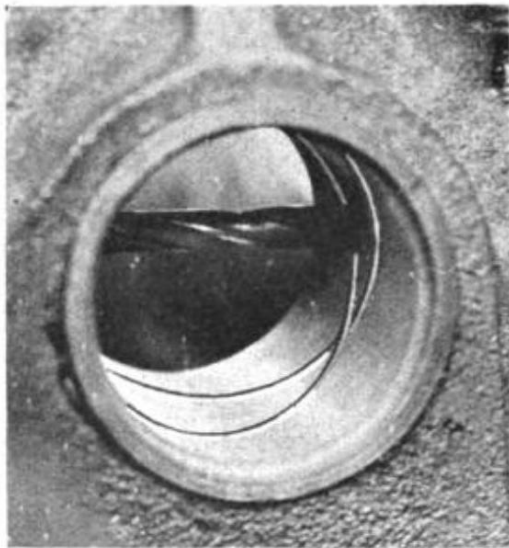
Showing How Drill is Used and Passing Through Oil Groove as Well as Aligning Holes in Web With Those in Bushing Which is Important.
